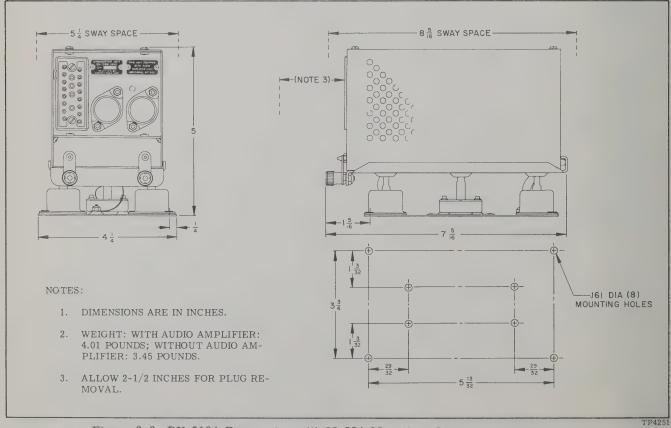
DV-318A Dynaverter with M-28A Mounting, Installation Dimensions
